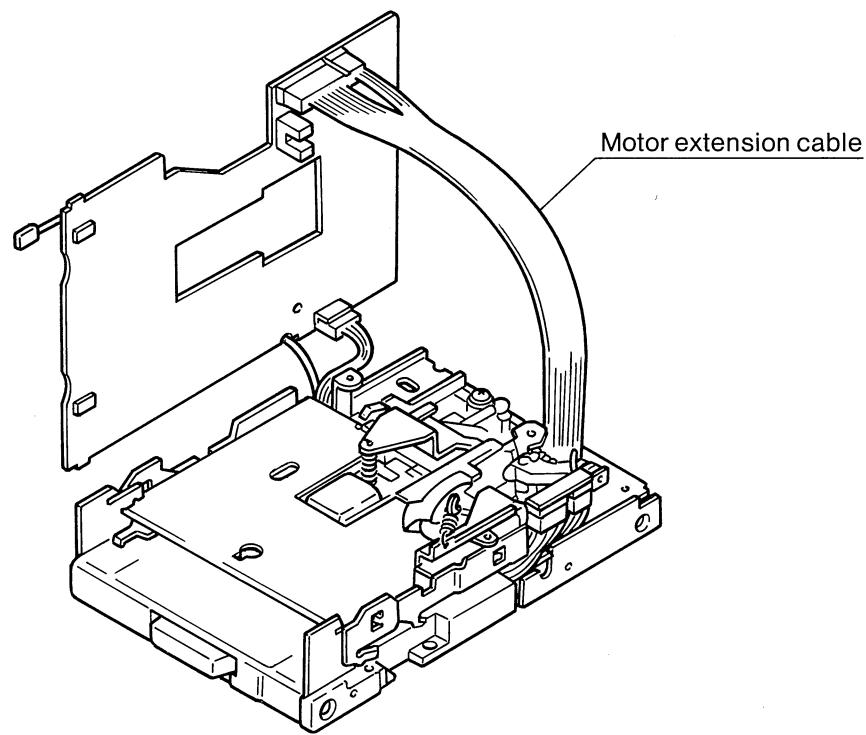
Adjusting Motor Extension Cable Installation Diagram
